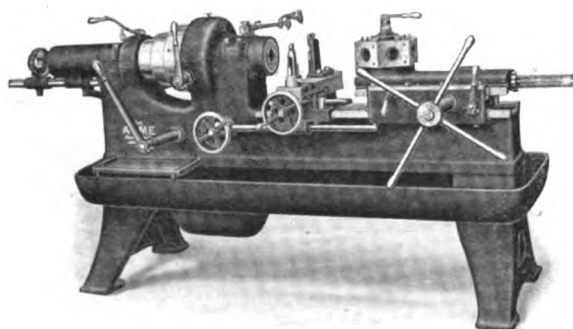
2¼x11 Inches (57x279 mm.) Screw Machine
